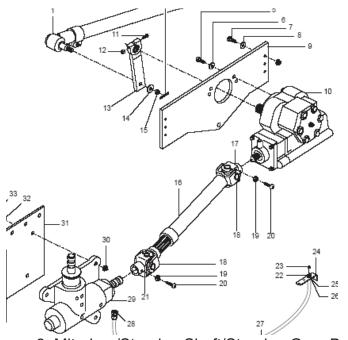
Miterbox/Steering Shaft/Steering Gear Box
